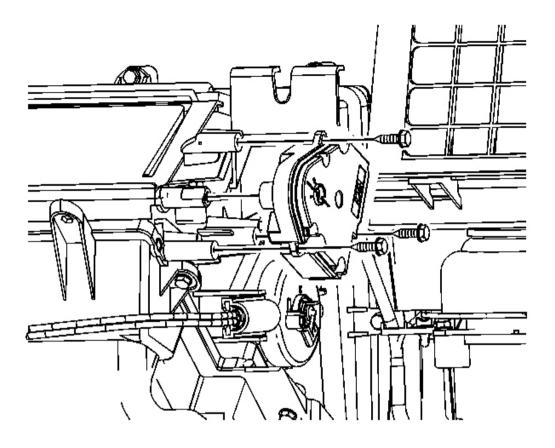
Floor Actuator, Screws & Evaporator Case Assembly Courtesy of GENERAL MOTORS CORP.
